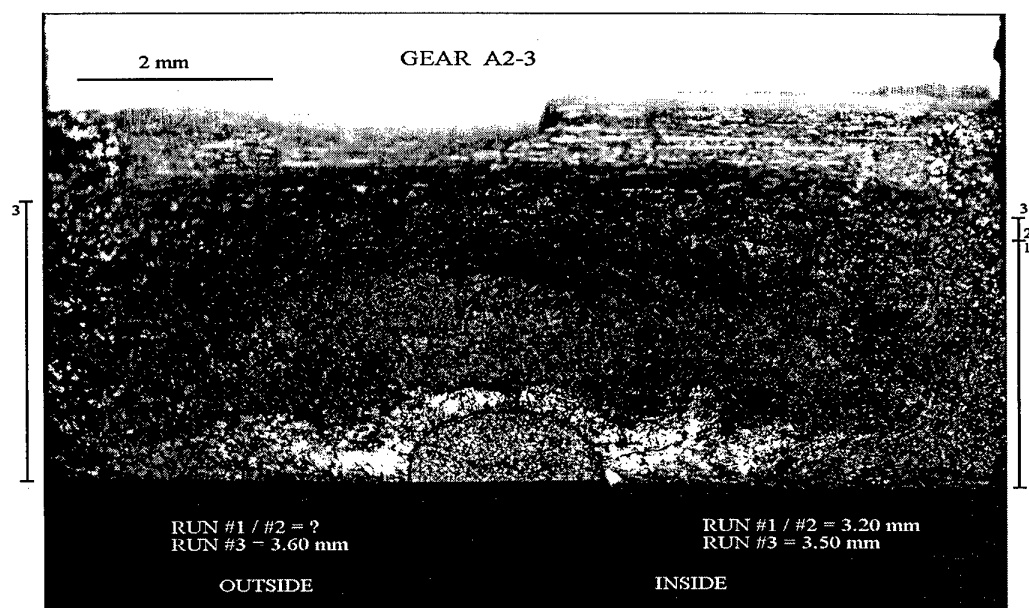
Fracture surface of Gear A2-3 with corresponding results of the Magnetic Rubber Inspection
